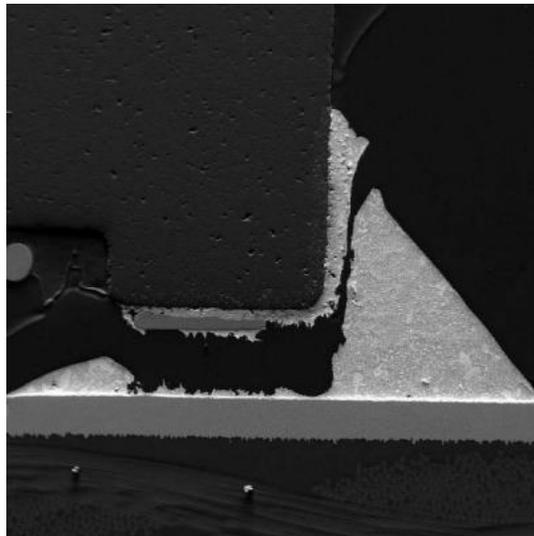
SOLDER JOINT FAILURE TENSILE RUPTURE (FRACTURE) [55]
